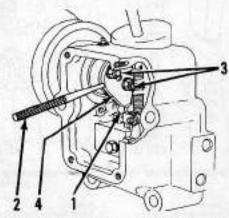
View showing rockshaft cam location in rockshalt bracket.
